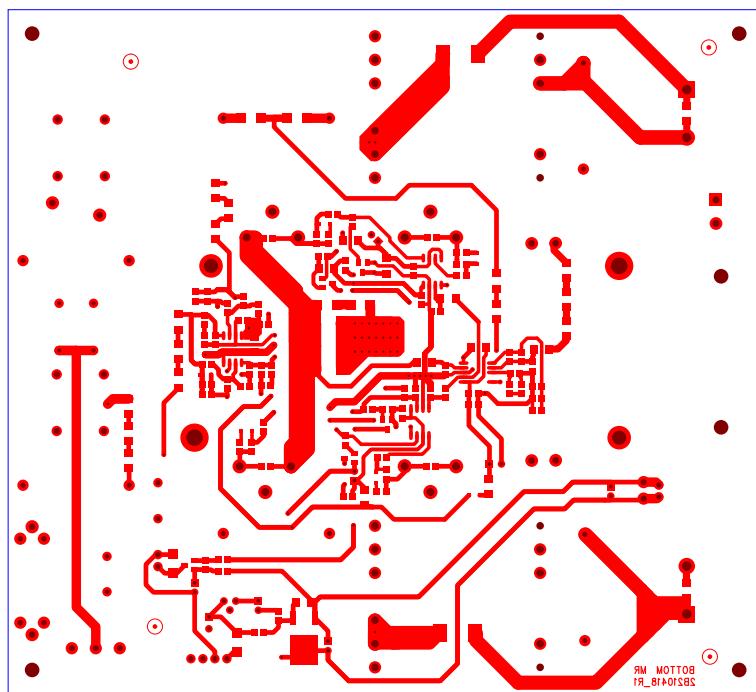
EVL4986A-1KWBL PCB tracks—bottom side
